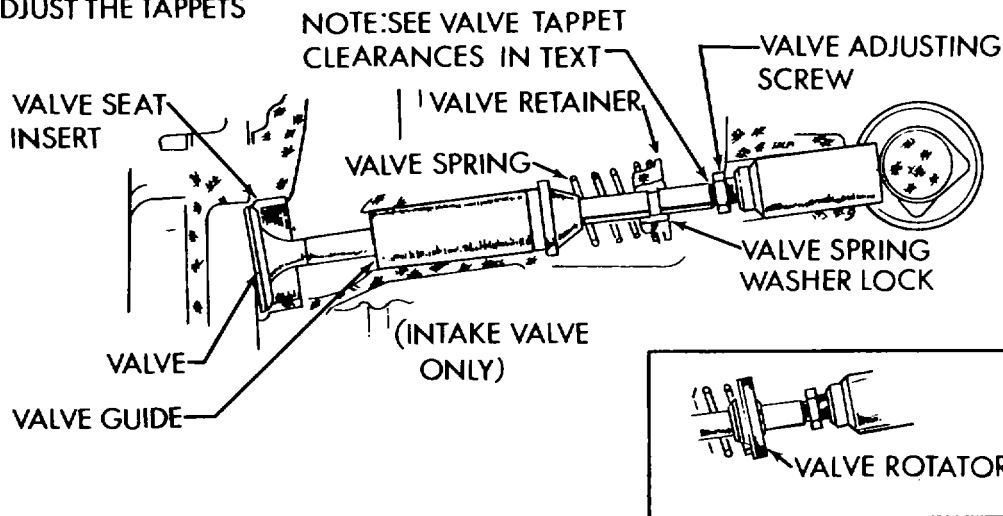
Cylinder Heads and Valves F1000RG-2
